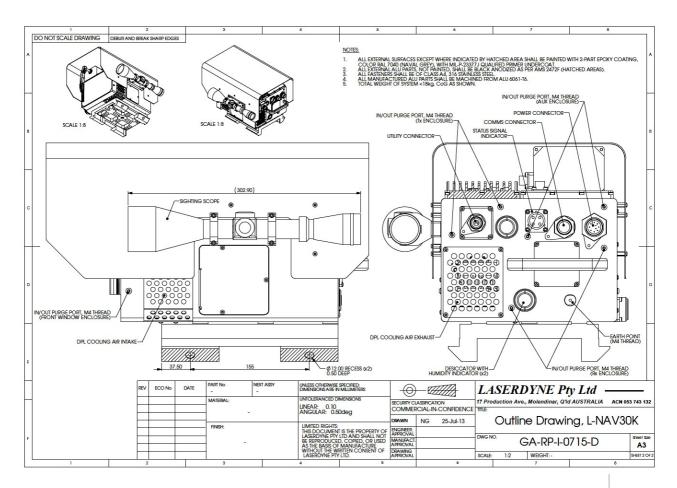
Outline Drawing Right, Rear & 3D Views
